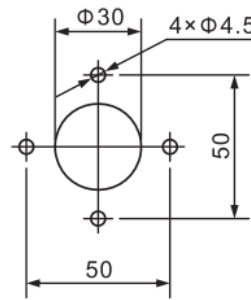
Dimension drawing of the mounting hole of the operating handle out of the B type cabinet
